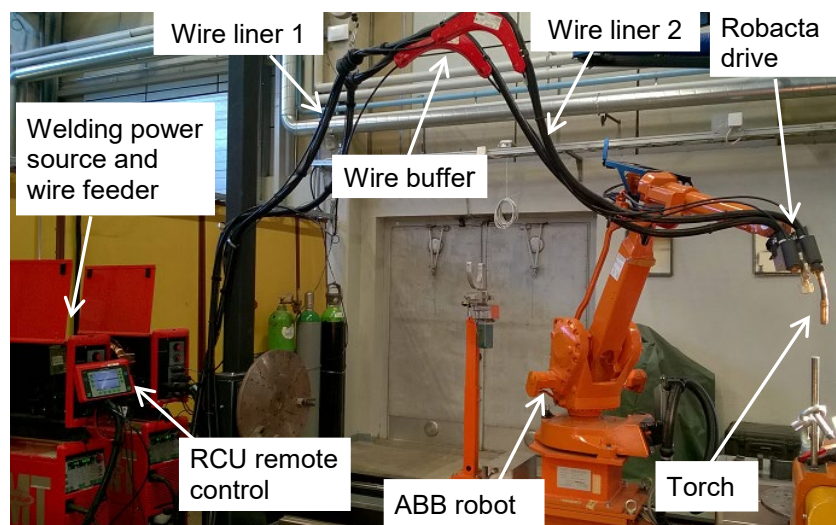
CMT equipment. Fronius TransPuls Synergic 5000 CMT (2 units) and ABB IRB 2400L welding robot. The whole system consists of two CMT power source units to enable welding with two wires — the TWIN process.
